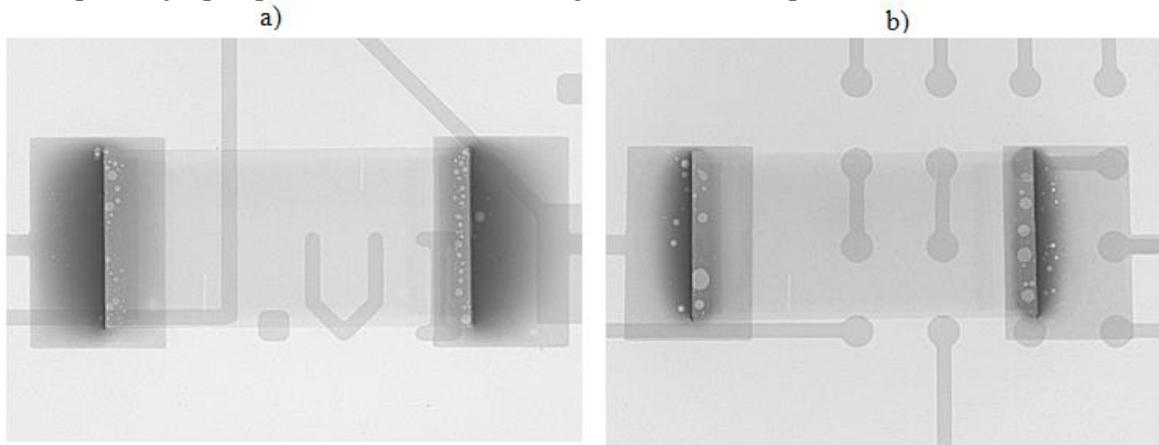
X-ray analysis of solder joints soldered by different methods – a) Solder joints with solder preforms in the flux b) Solder joints with solder paste printed through the stencil
